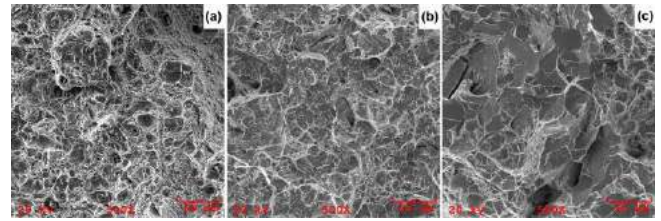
Fracture surfaces of a) cast sample, b) A0, c) B0
